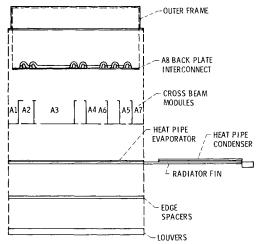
Top view of exploded power-processing unit: TSSM assembly.
